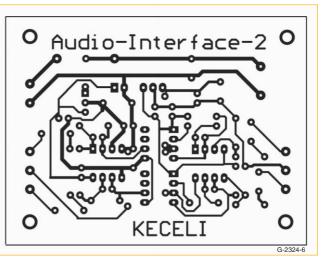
The PCB for the second solution is a single-sided board; soldering side (for retrofitting).
